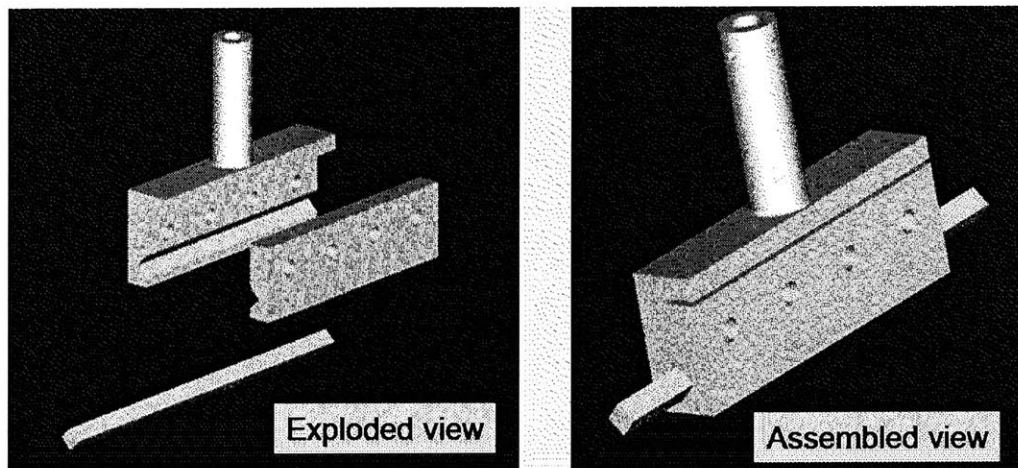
Drawings of fabric uniaxial tensile grip (C)
